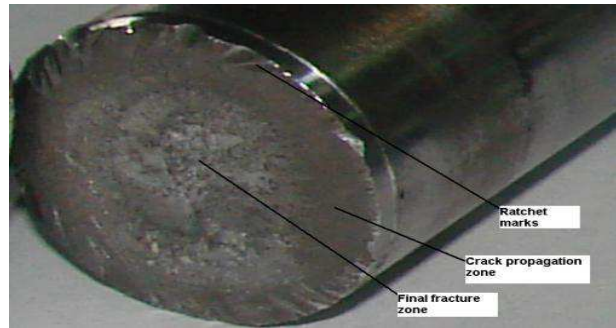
Fracture Surface of a shaft under fatigue loading.
